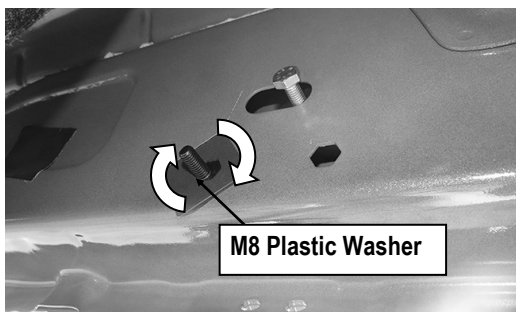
M8 Bolt/Nut Plate (NOTE: M8 Bolt/Nut Plate is not required on models with threaded inserts)
